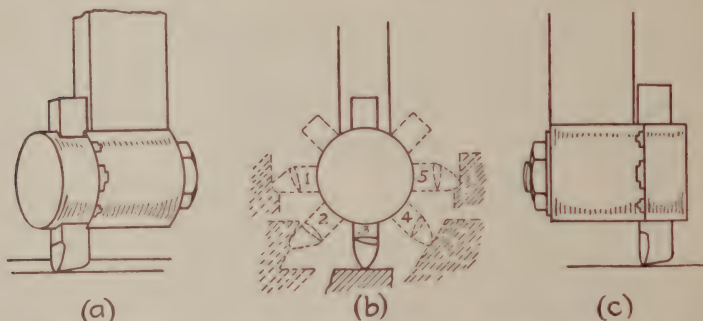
Armstrong planer or shaper tool. (a) Normal position for horizontal surface; (b) tool arranged for (1) vertical cut; (2) angular cut (inside angle); (3) horizontal cut; (4) angular cut; (5) vertical cut; (c) toolholder (and tool bit) reversed, brings cutting edge back of shank of toolholder.
